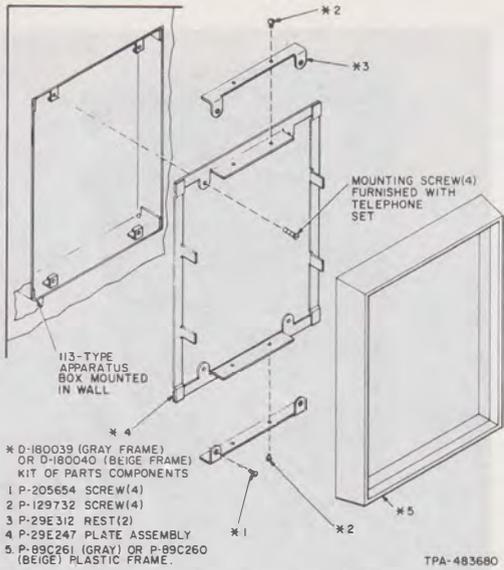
Installation of D-180039 or D-180040 Kit of Parts
